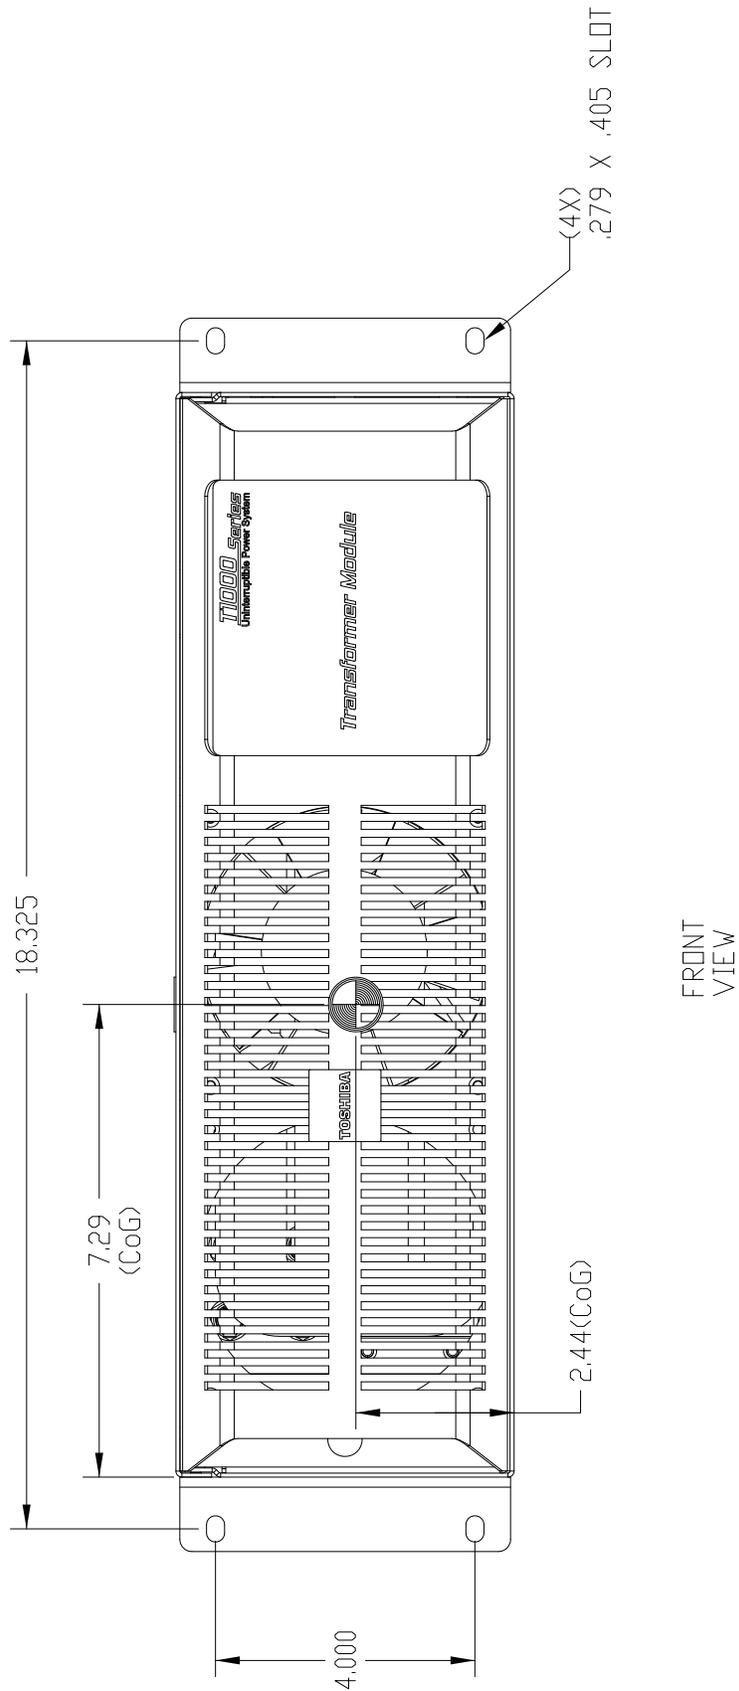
T1000 TRANSFORMER MODULE - FRONT
